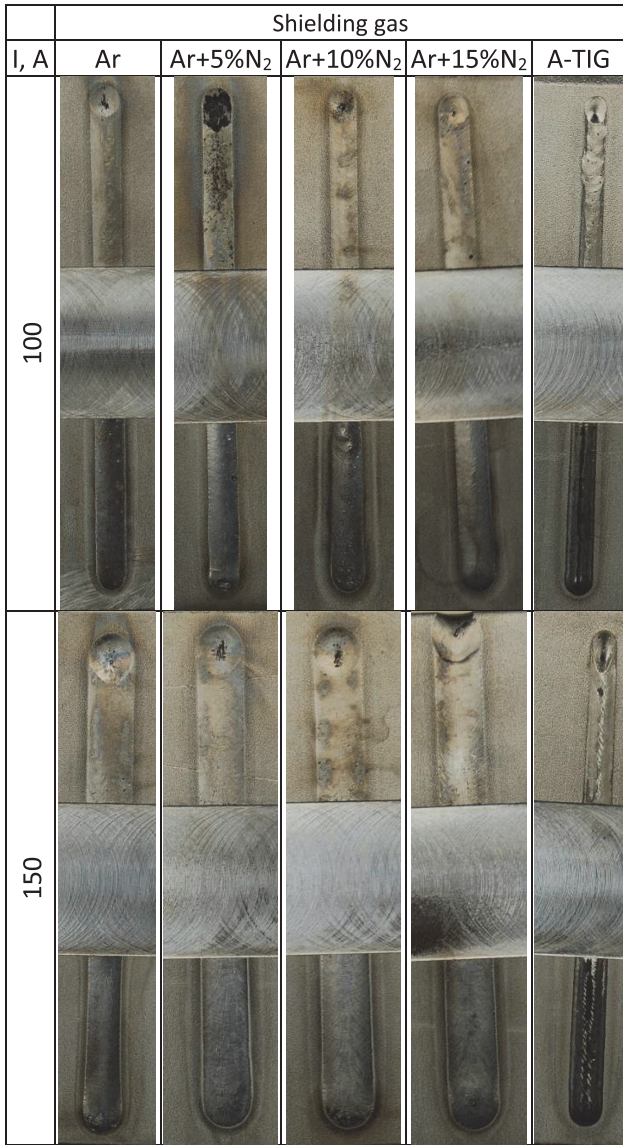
The TIG and A-TIG welded joint of stainless steel S82441 made with current of 100A after corrosion test ASTM G48 at temperature 25°C
